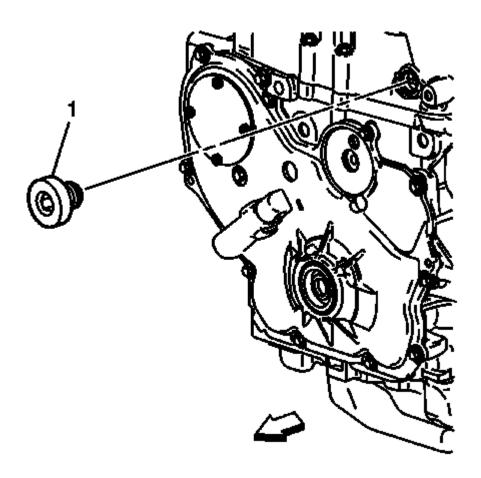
Fixed Timing Chain Guide Bolt Plug Courtesy of GENERAL MOTORS COMPANY
